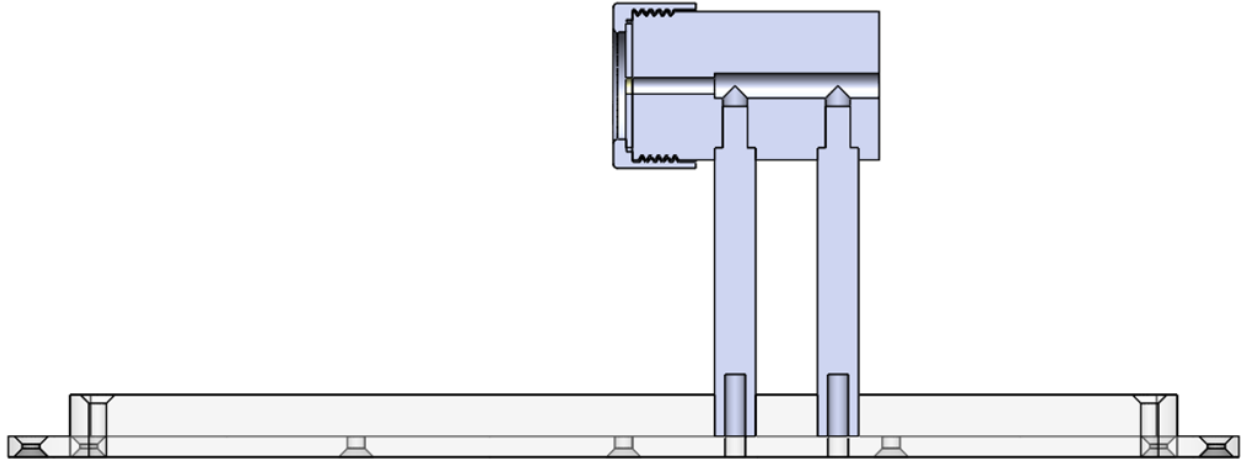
CAD drawing of the cross-section view of final design of Mode I test.
